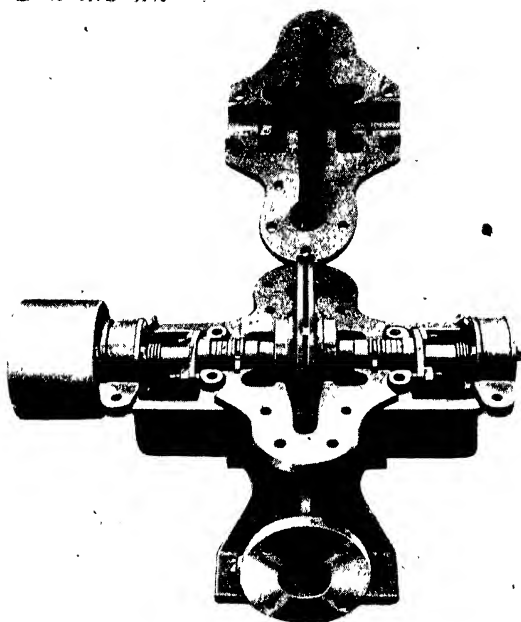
SPLIT CASING PUMP WITH COVER REMOVED
